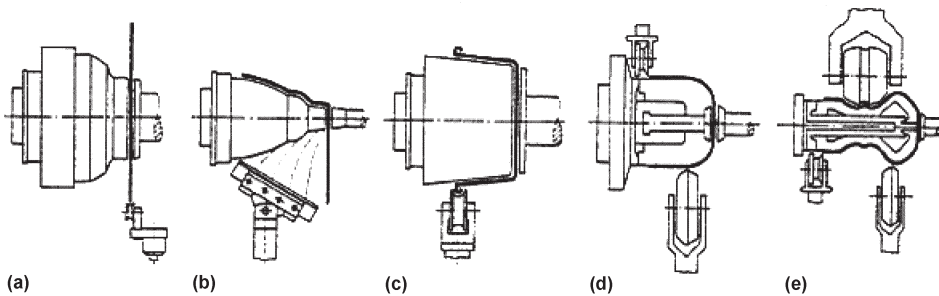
Additional assisting tool devices. (a) Centering. (b) Cutter. (c) Edging roller. (d) Cutting roller. (e) Profiled roller. Source: Ref 12.12
